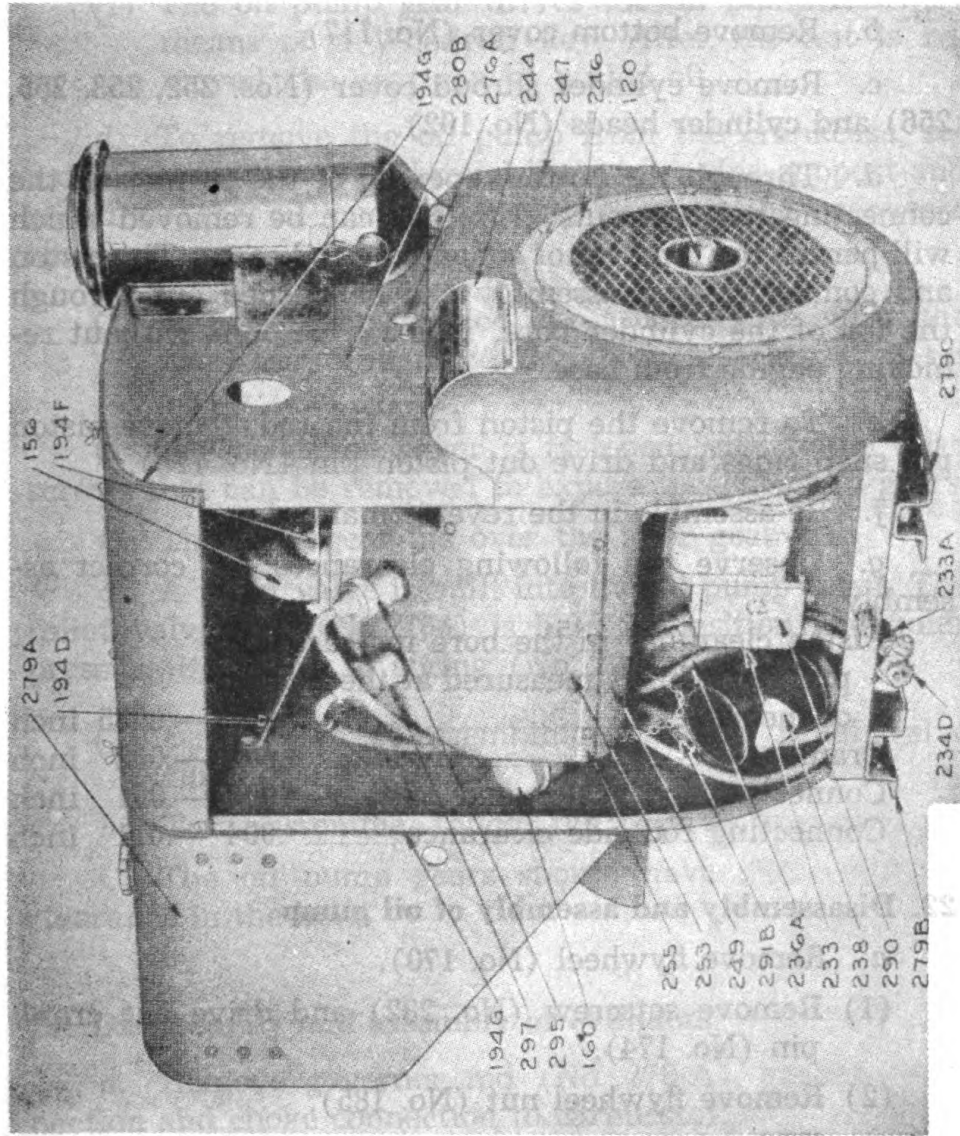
ENGINE, MAGNETO, SIDE VIEW
